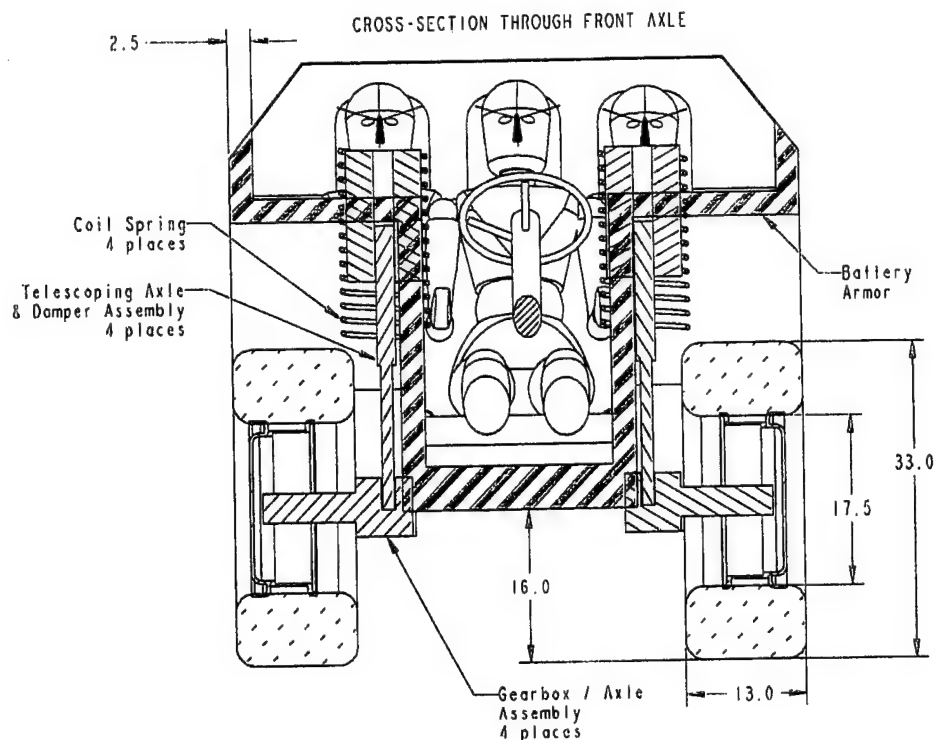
Hybrid Electric Drive System - Perpendicular Cross Section
